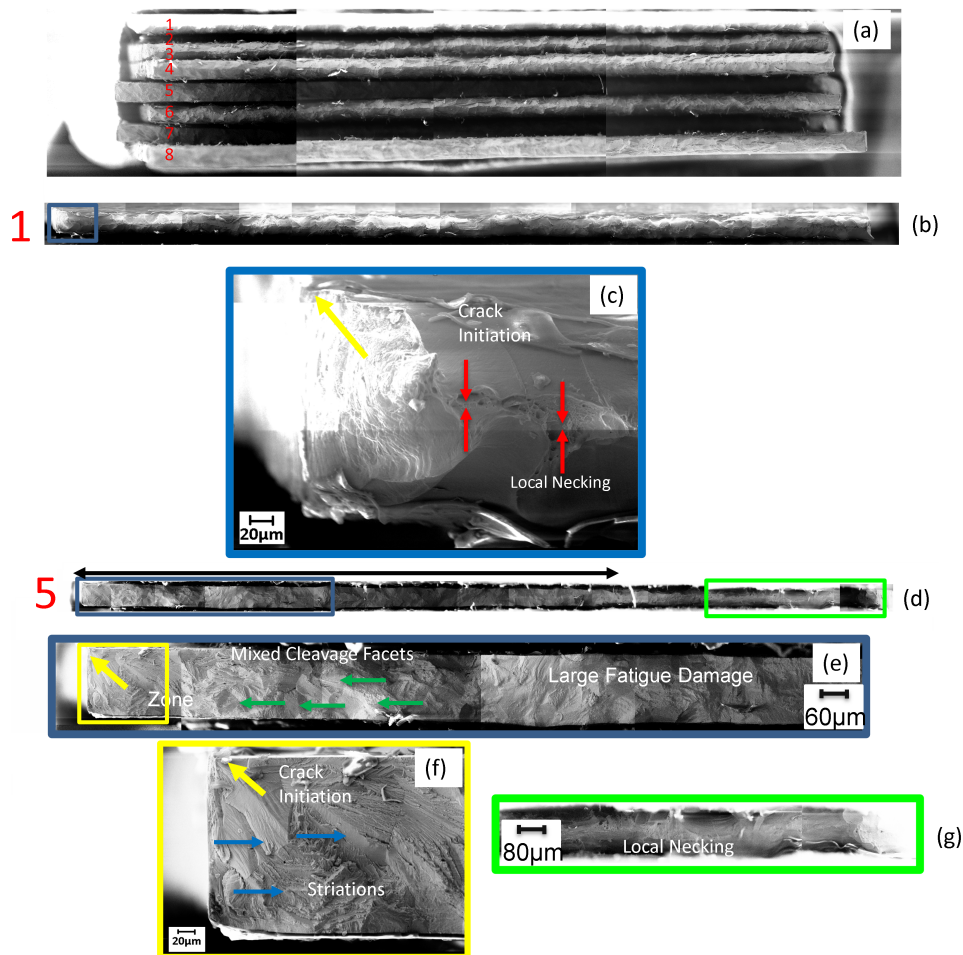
Fatigue sample for high temperature tested laminated sample, $N_f = 135,929$ cycles, (a) overall view of fracture surface (b) view of sheet 1 (c) crack initiation point of sheet 1 (d) view of sheet 5 (e) fatigue damage zone of sheet 5 (f) crack initiation point on sheet 5 (g) local necking on sheet 5
